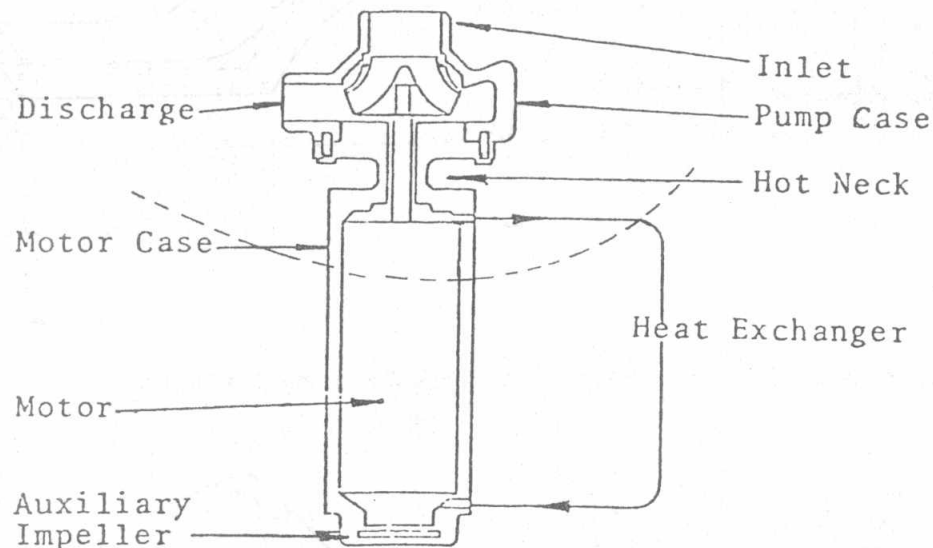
G.M.P. Pump and Motor Unit Assembly.
